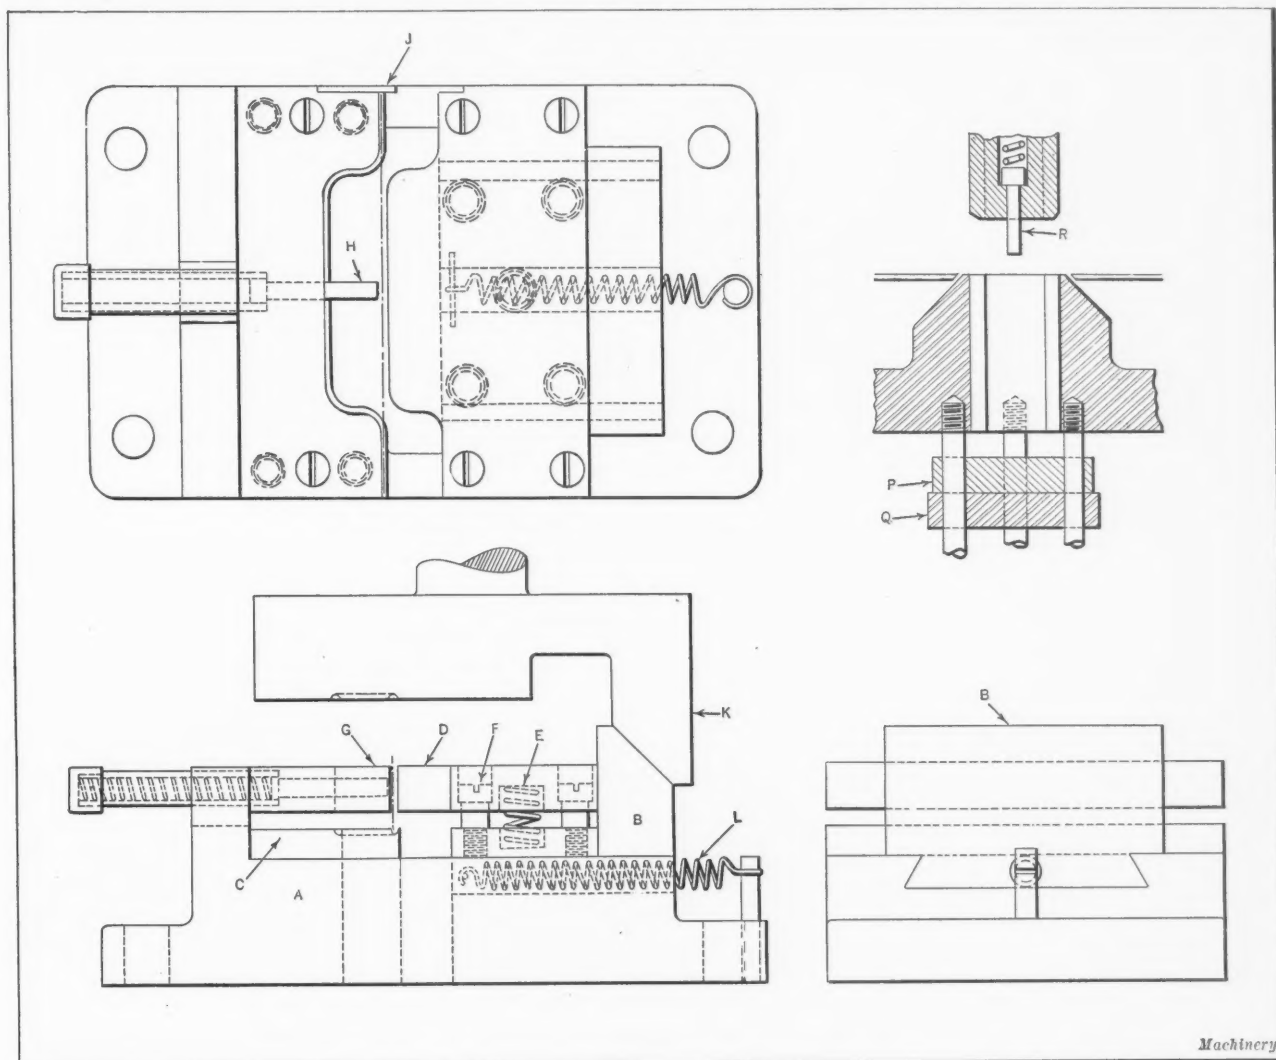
Dies employed for blanking, forming and curling a Can Handle
